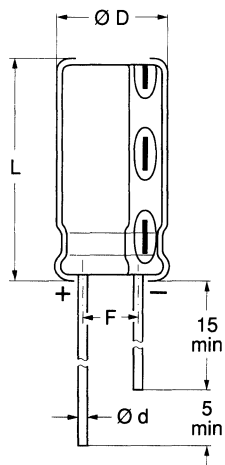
Form CA, long leads; see Table 2 for dimensions.
